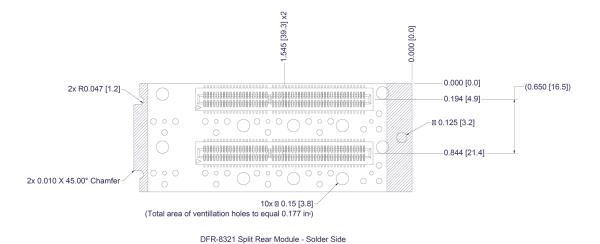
DFR-8321 Split Rear Module — Solder Side
